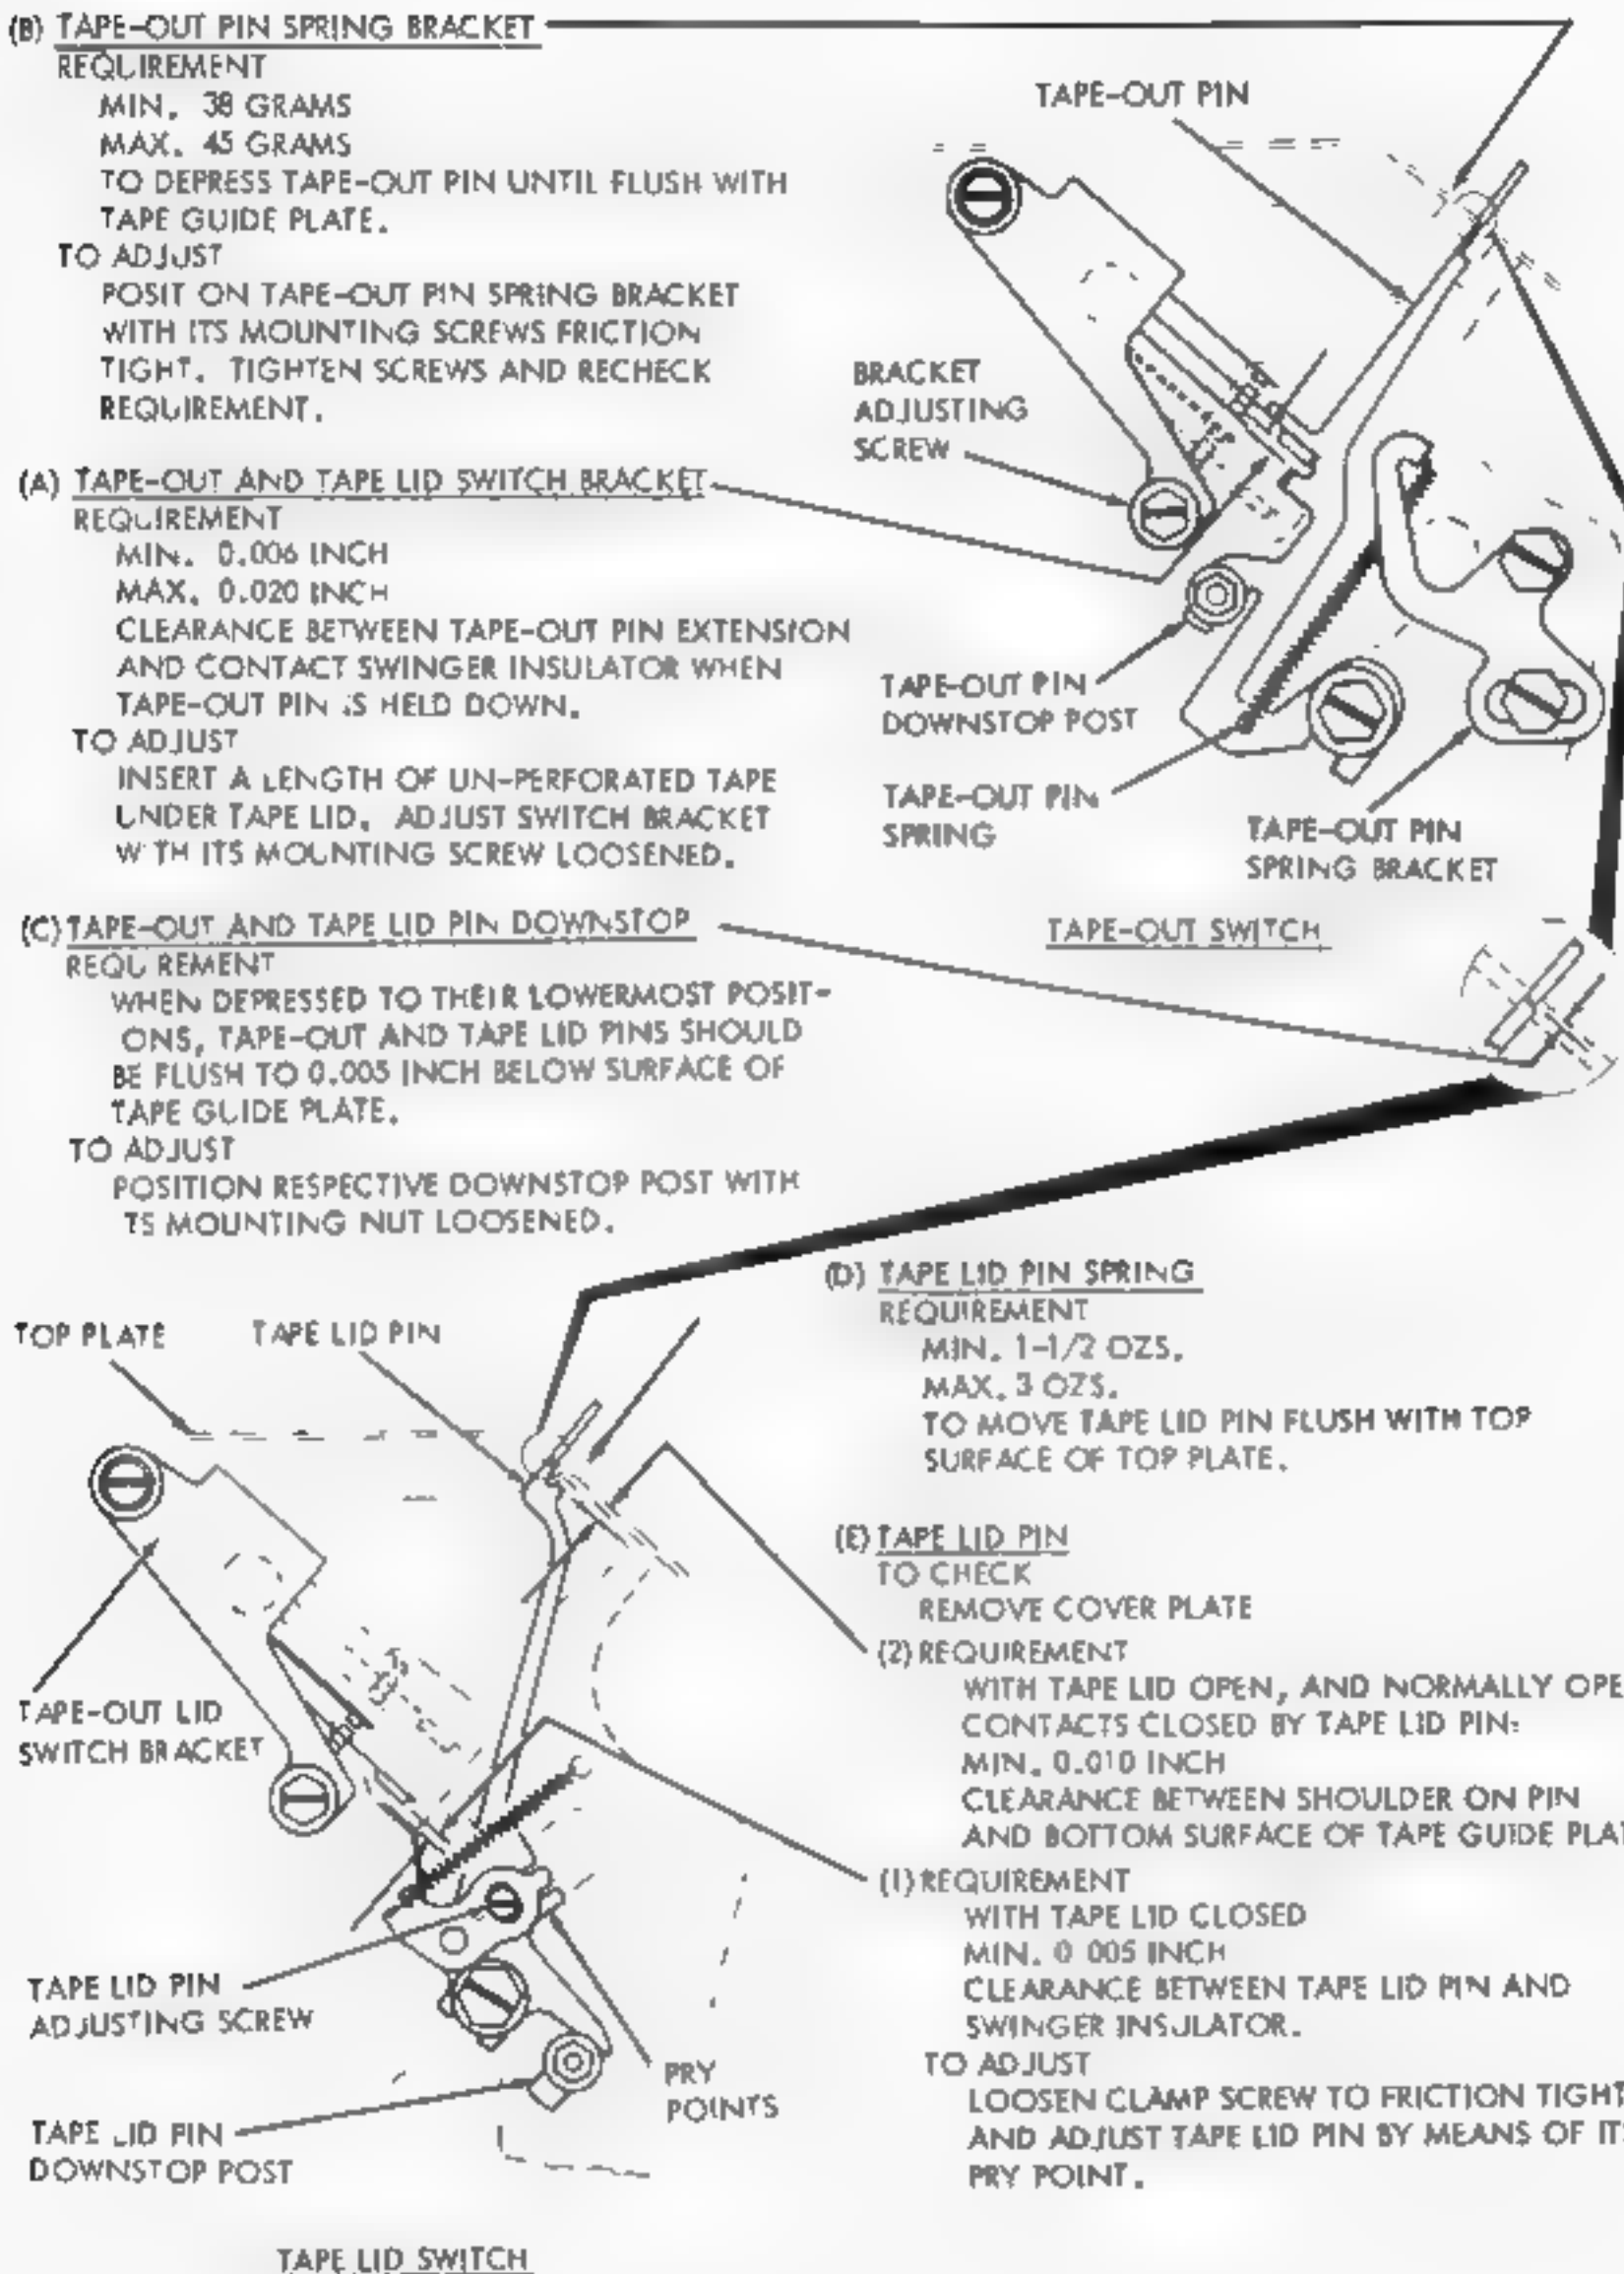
TAPE-OUT AND TAPE LID PIN MECHANISM
